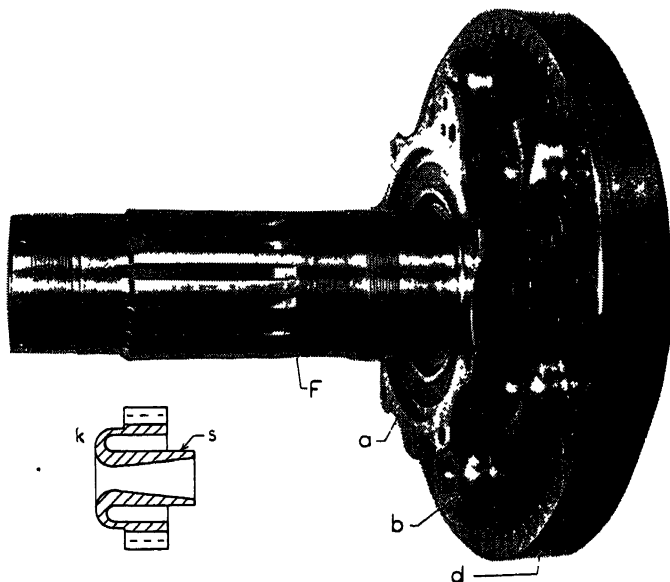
Reduction Gears of Wright Cyclone 9 Aircraft Engine.
